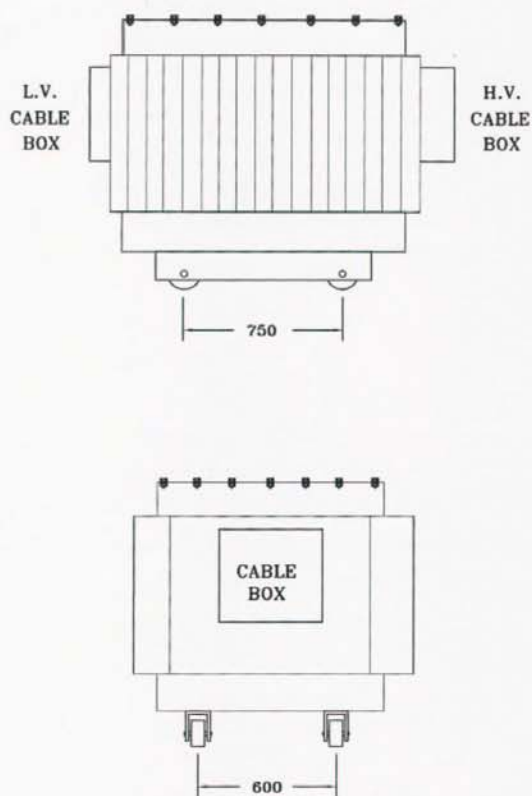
ROLLERS SPACING FOR PAD MOUNTED DIST. TRANSFORMER
